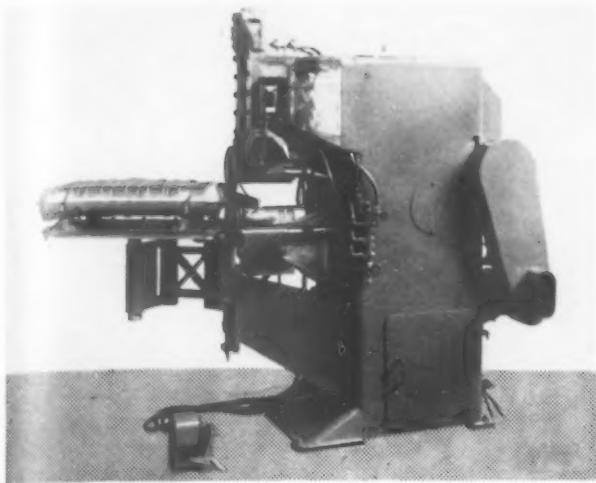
Ball bearing mounted fixture for welding circumferential tank seam.
